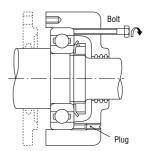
Removal of Outer Ring with Dismounting Bolts
